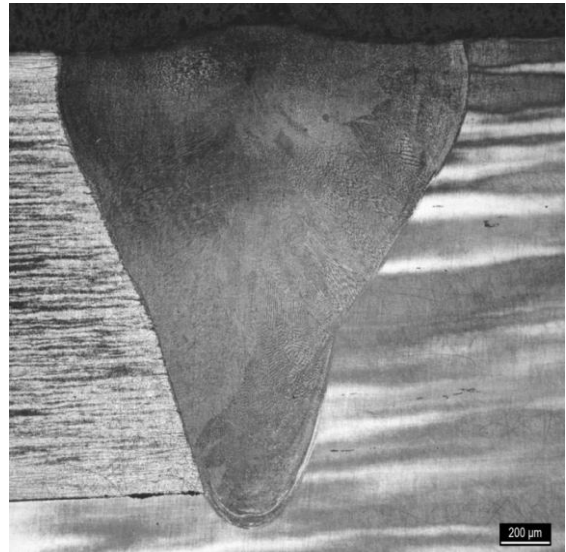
Micro structure of weld with weld speed 900 rpm
